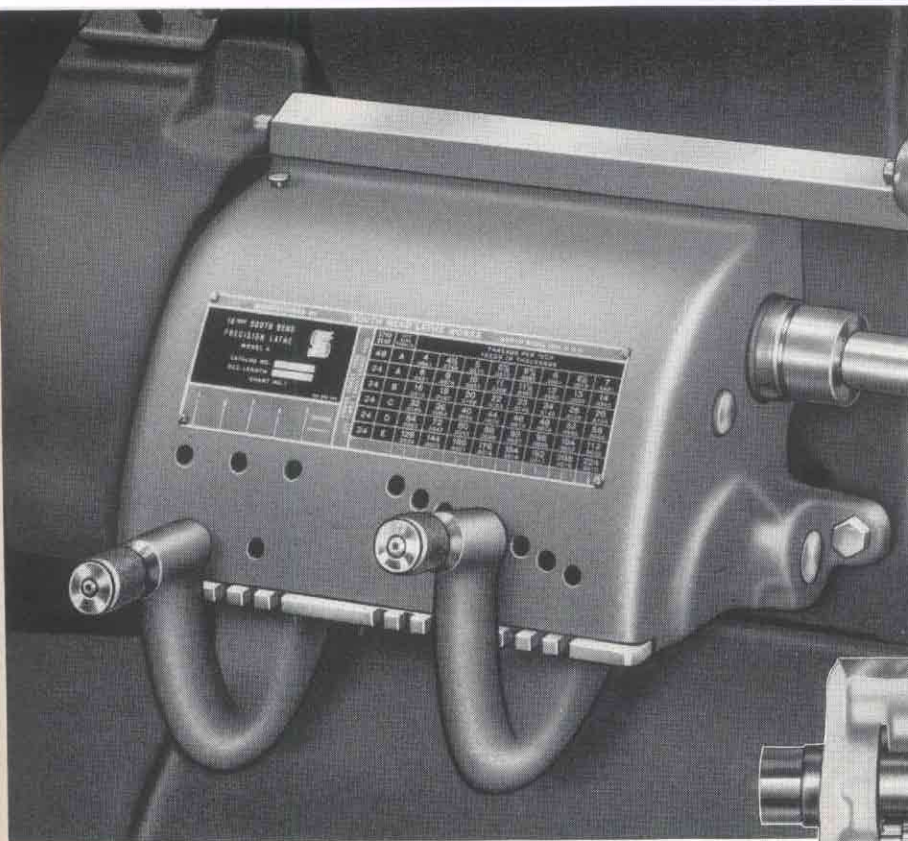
Improved Quick Change Gear Box for South Bend Lathes
